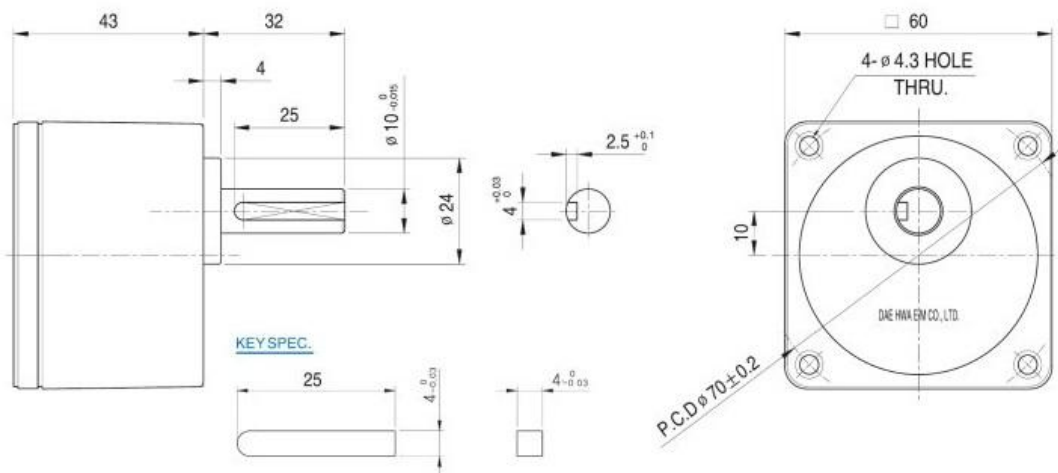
Outline drawing of gearbox (ExceM, p.16, n.d)
